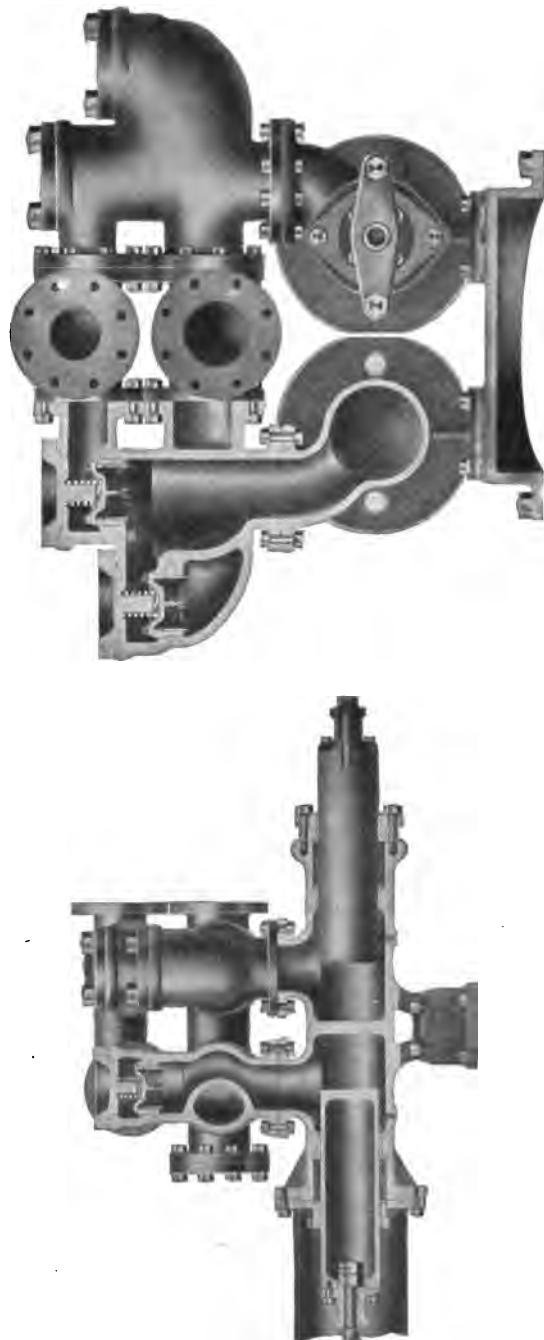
Sectional Views of the End-packed Pot-valve Pump.
